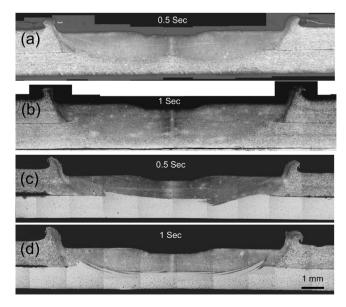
Cross-sections of typical pinless AA6111-T4 FSSWs, produced with short dwell times of (a) 0.5 and (b) 1 s, compared to interface marker alloy welds between AA6111 and AA6082 made with the same welding times (c) and (d).
